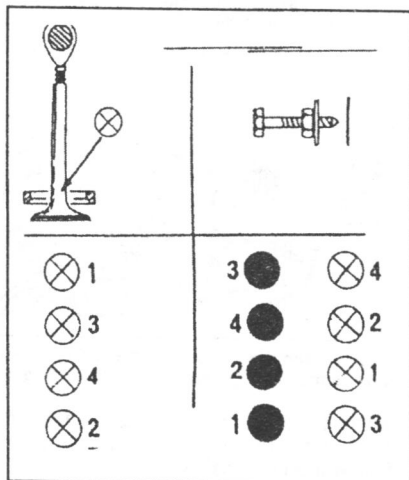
Adjusting the valve clearances. Exhaust valves are marked with "X" in circle, inlet valves are marked black. With the exhaust valves on the left opened, adjust the valves shown on the right.
